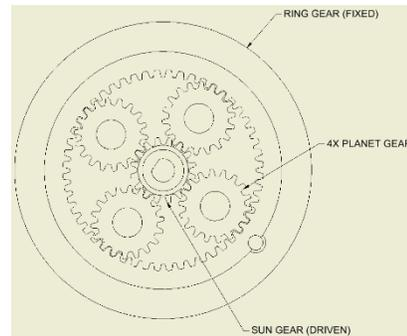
Detailed View of Planetary Gearbox (Inventor)
